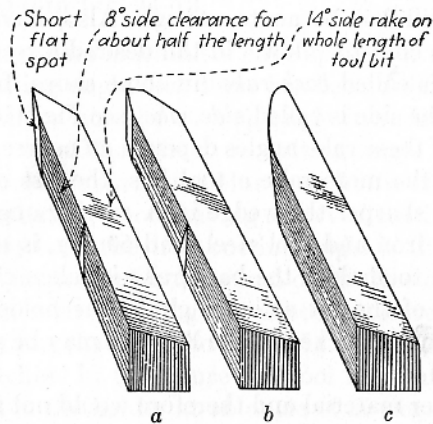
Tool bits beveled on the top for side-rake angle. Sharpened by grinding on the end only. (a) Facing, (b) shoulder, and (c) turning.
